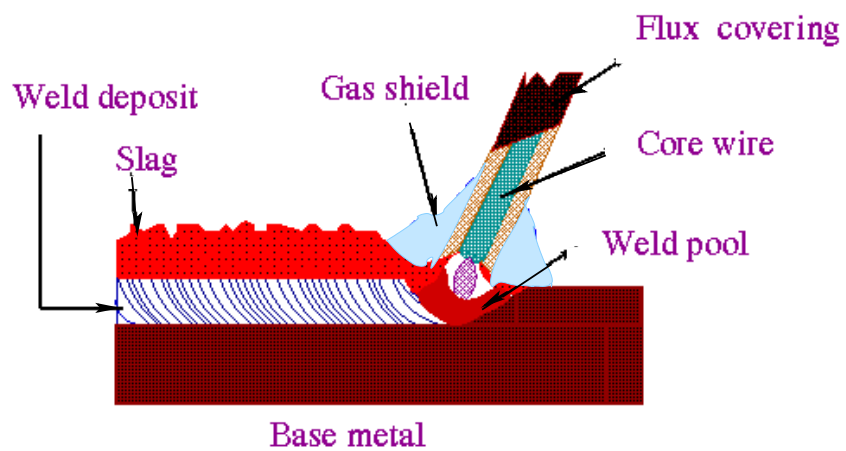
Schematic view of manual metal arc welding (MMAW).
